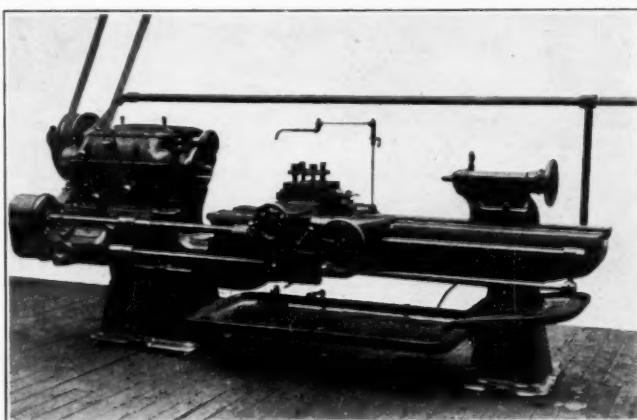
TYPICAL BRITISH ALL-GEARED-HEADSTOCK CENTER LATHE
